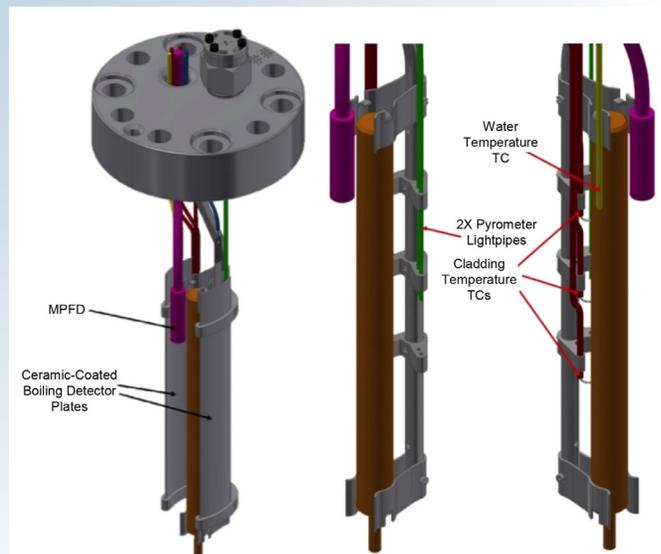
Instrumentation design for each Multi-SERTTA capsule. (Left) Head unit assembly, (middle) right view of hangar rod showing IR pyrometer light pipes, (Right) left view showing thermocouples.
